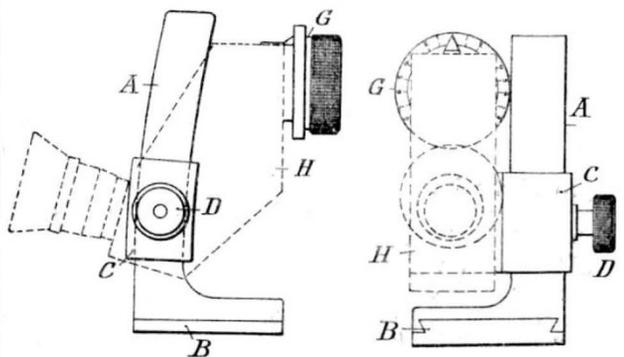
Prism telescope sight on elevating arc with lateral correction to object glass for windage.
